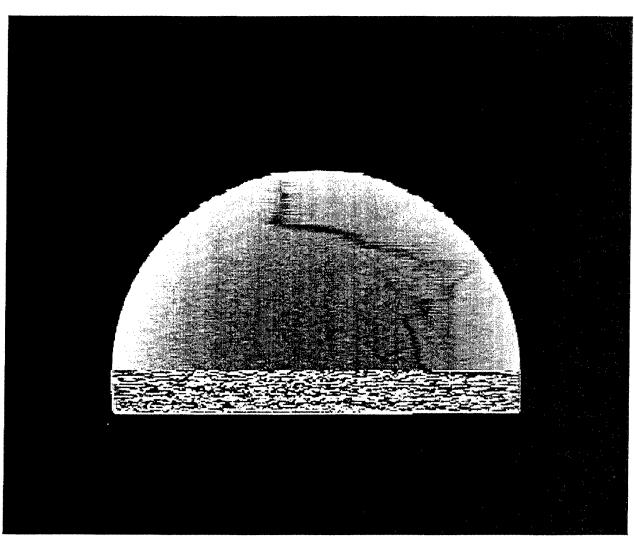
16.76 mm from bottom of disk with 65° rotation about X-axis.
